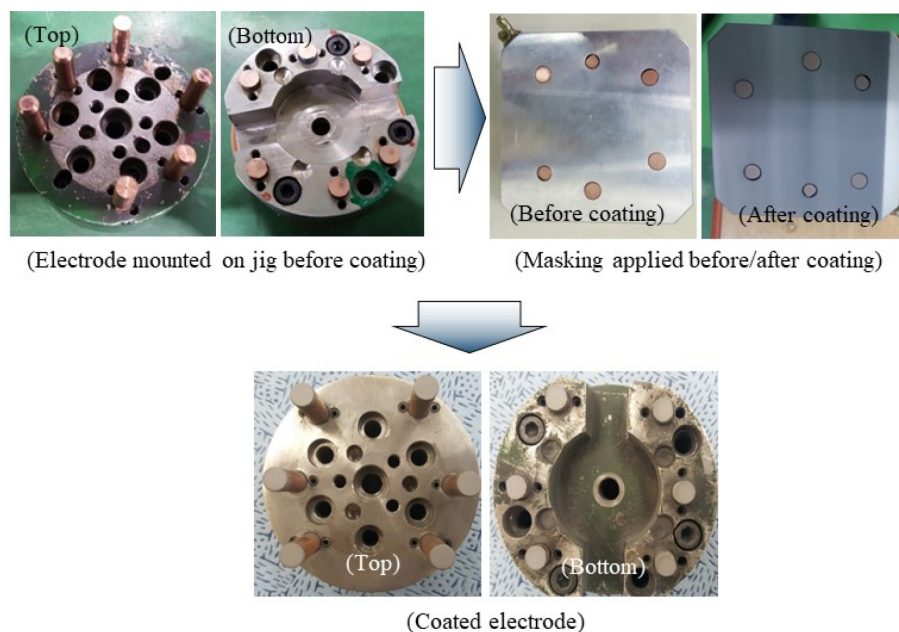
Picture of the composition and coating of the projection welding electrode
